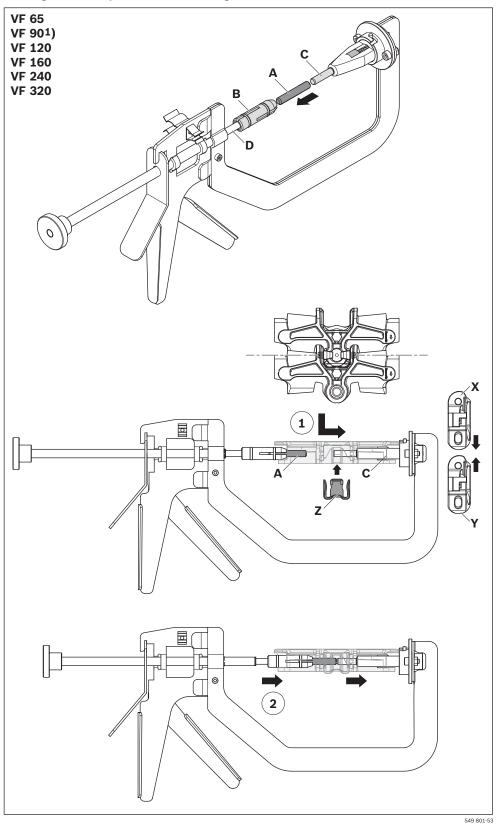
Closing the conveyor chain (extending), VF 65/VF 90/VF 120
